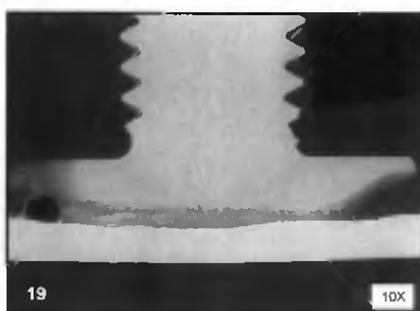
Macrograph of stud weld, Cu-coated stud, stud negative, used collet, TRANSREC power, large flange stud, 1.4-mm HDG sheet with light oil coating.
